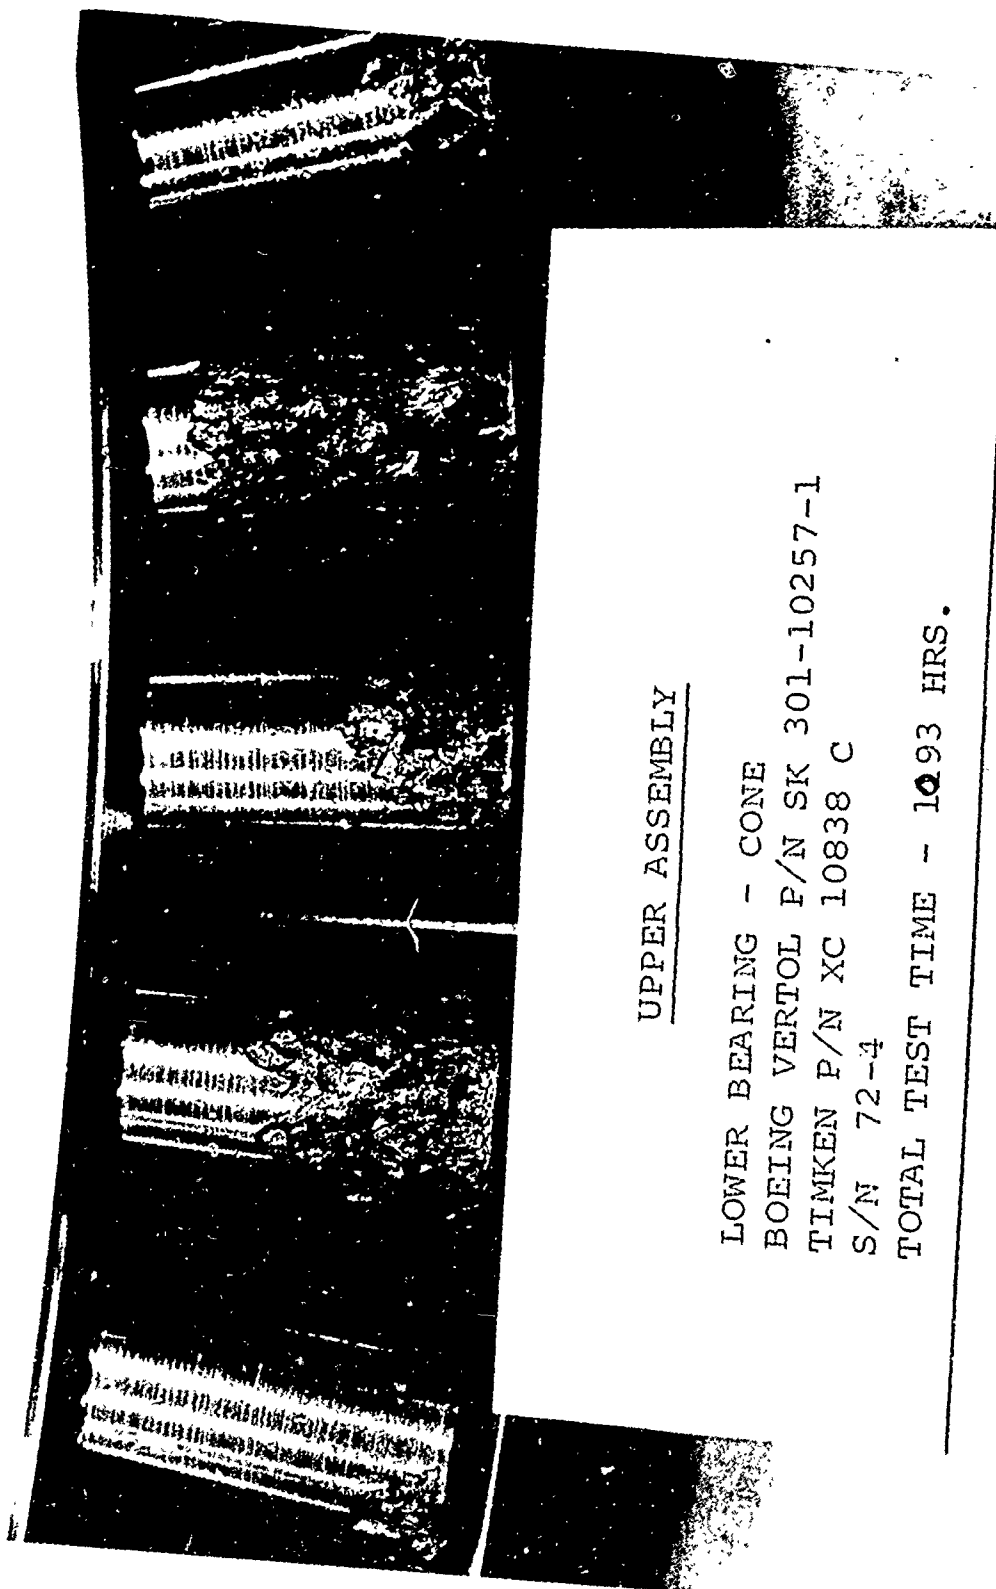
Failed Rollers of SK301-10257-1 Bearing.
